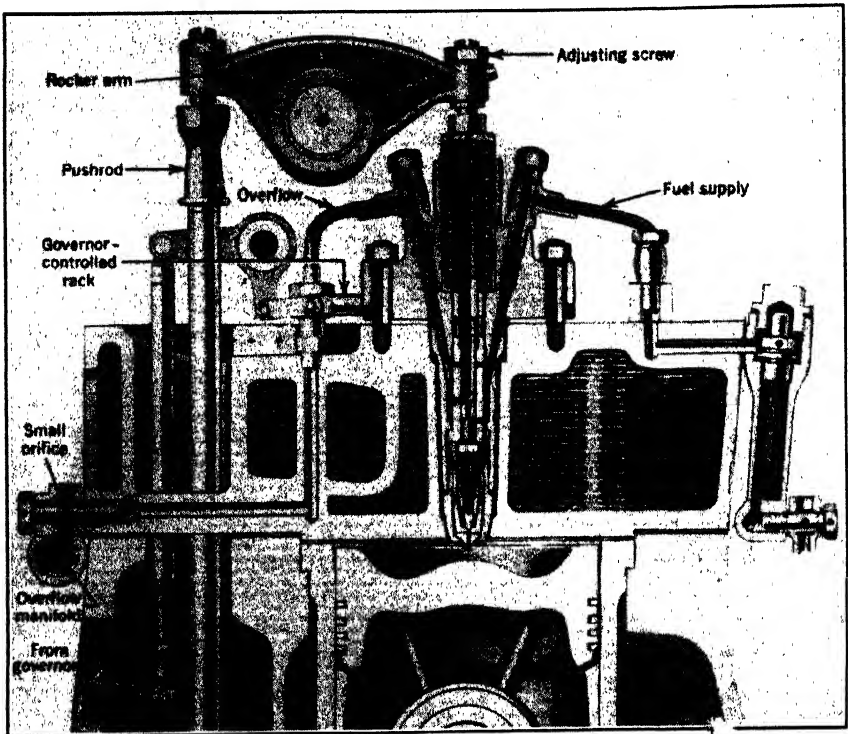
Section through unit fuel injector, cylinder head, and piston of Winton two-stroke cycle engine.
